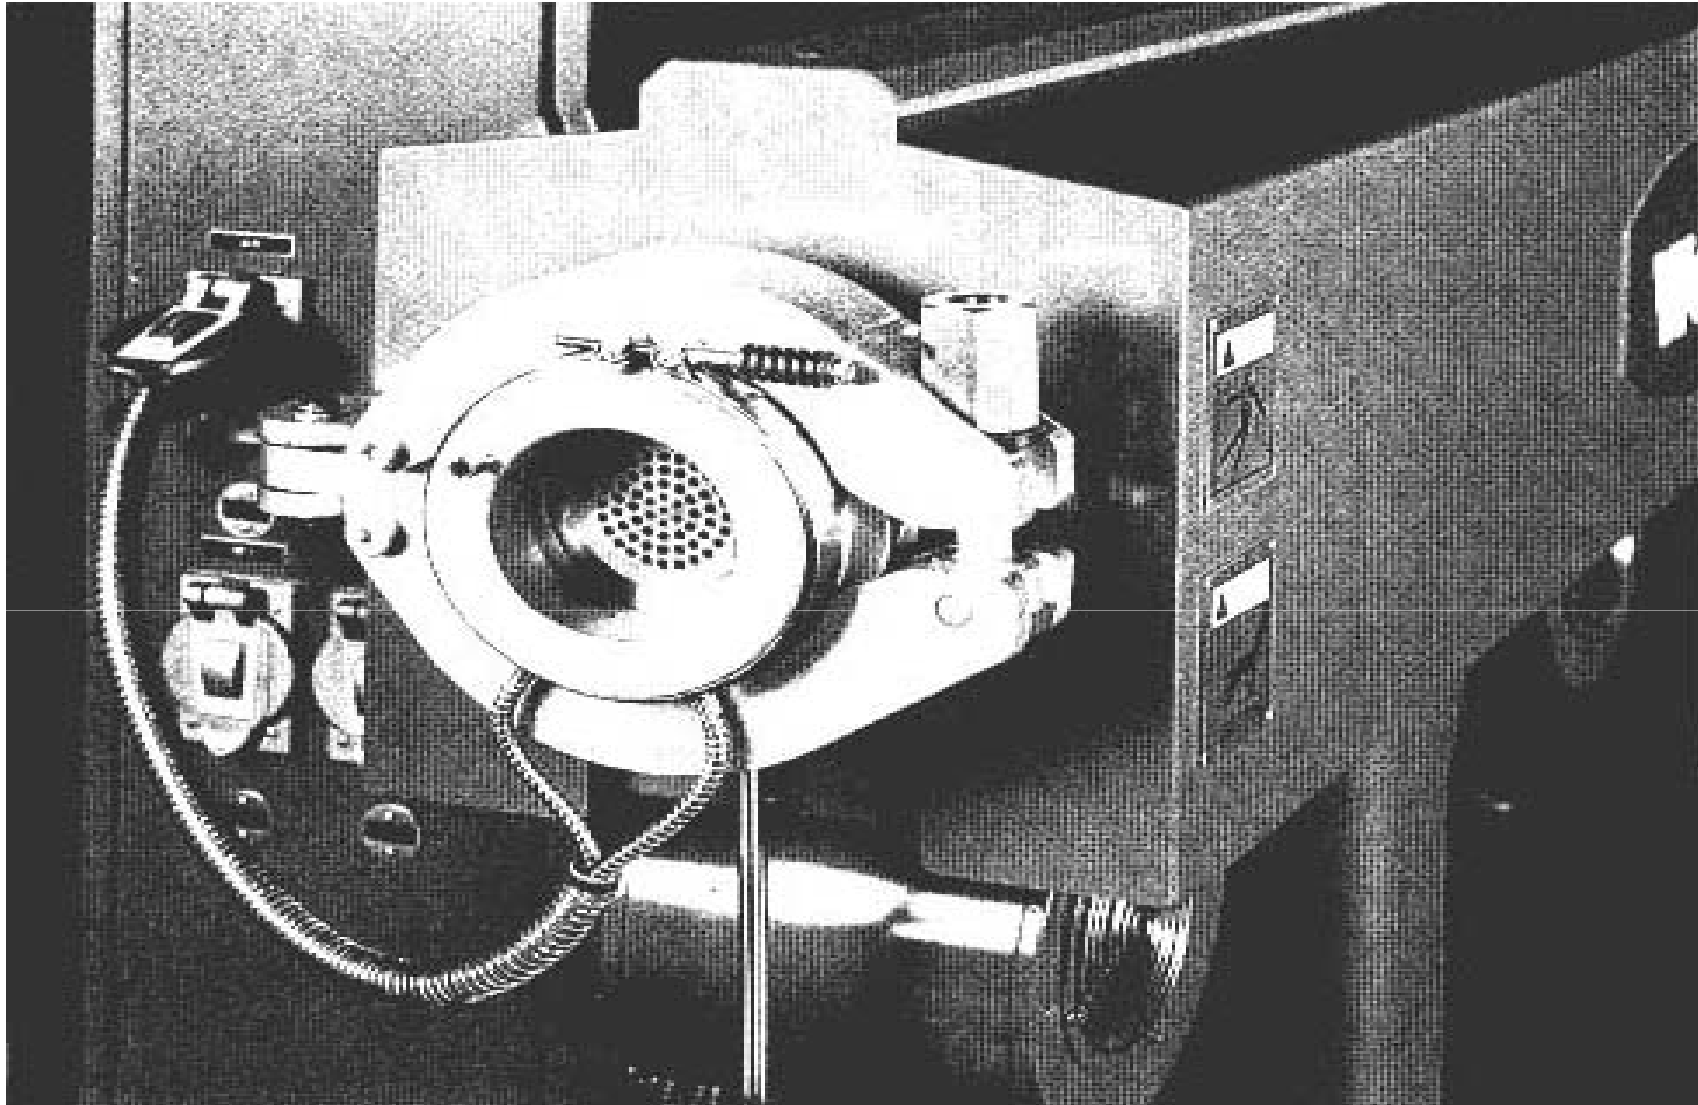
Single bolt quick die clamping front end of a Welex extruder with pressure safety bolt.
